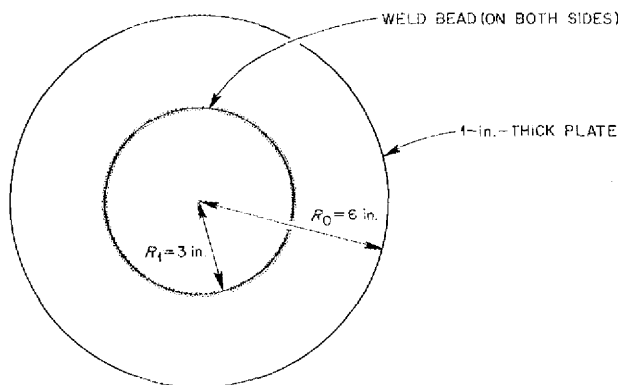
Sketch Showing the Location of the Weld Bead in Relation to the Overall Specimen Geometry.
